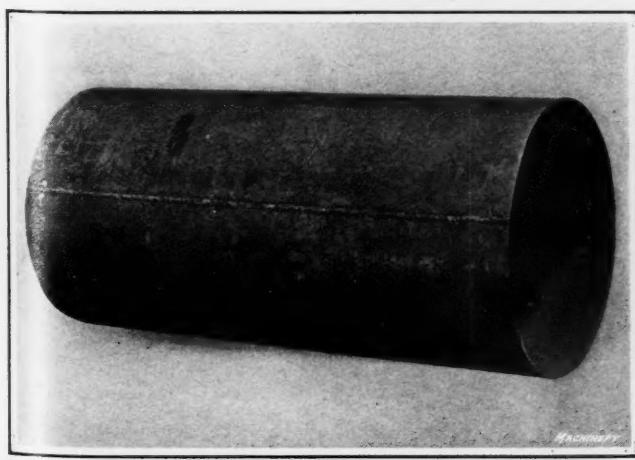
Tank with Six Seams that were welded by Electric Arc-welding Process
